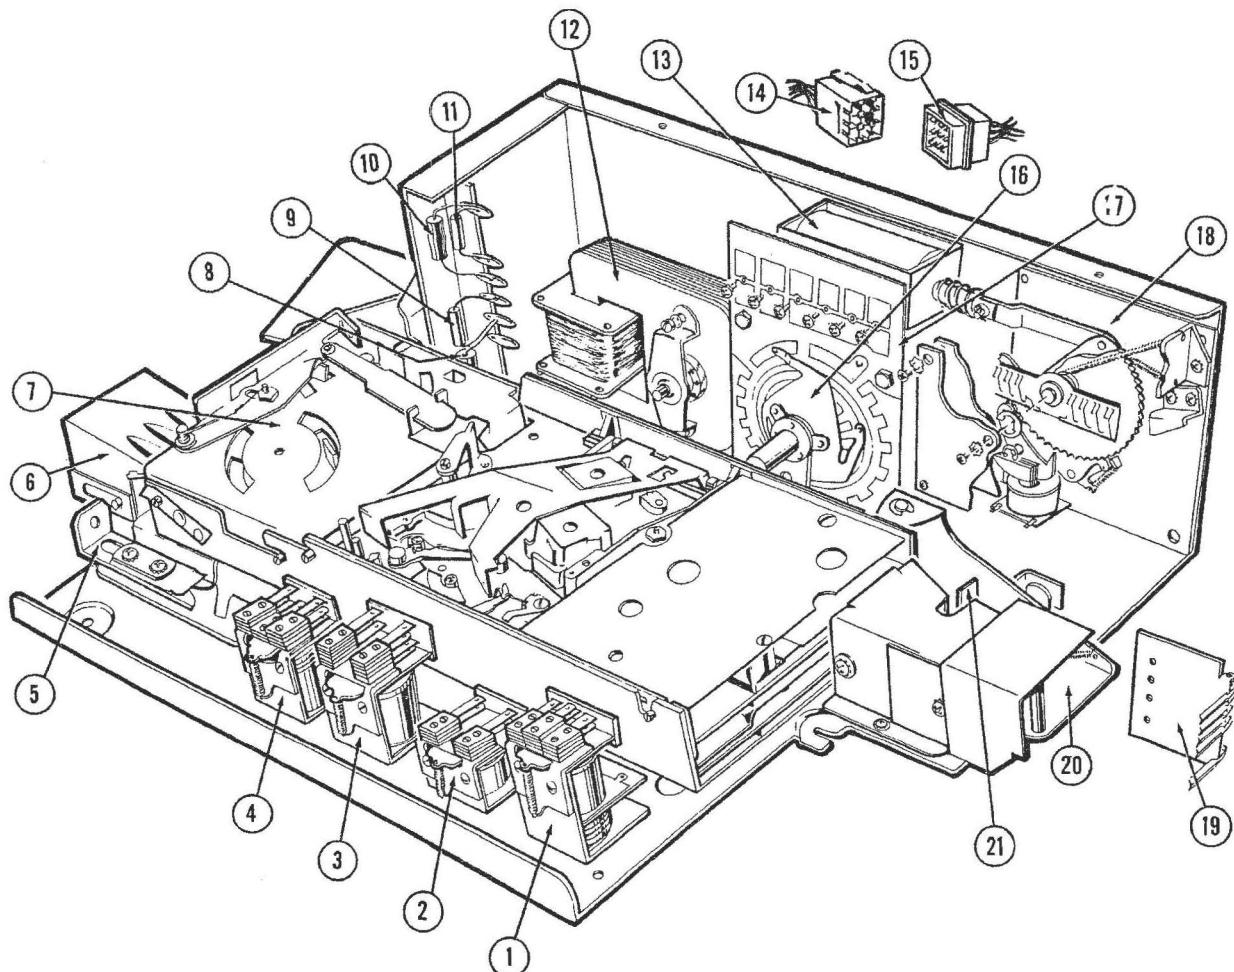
COIN REGISTER MECHANISM, DUAL PRICING
